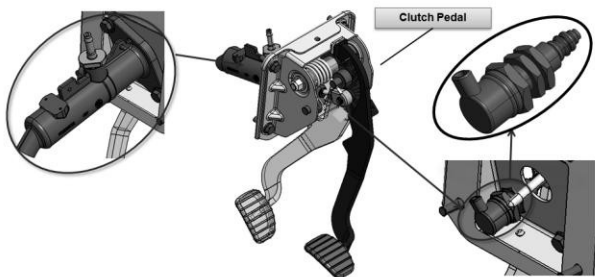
Clutch Pedal, Clutch Master Cylinder, Clutch Pedal Switch Sensor
